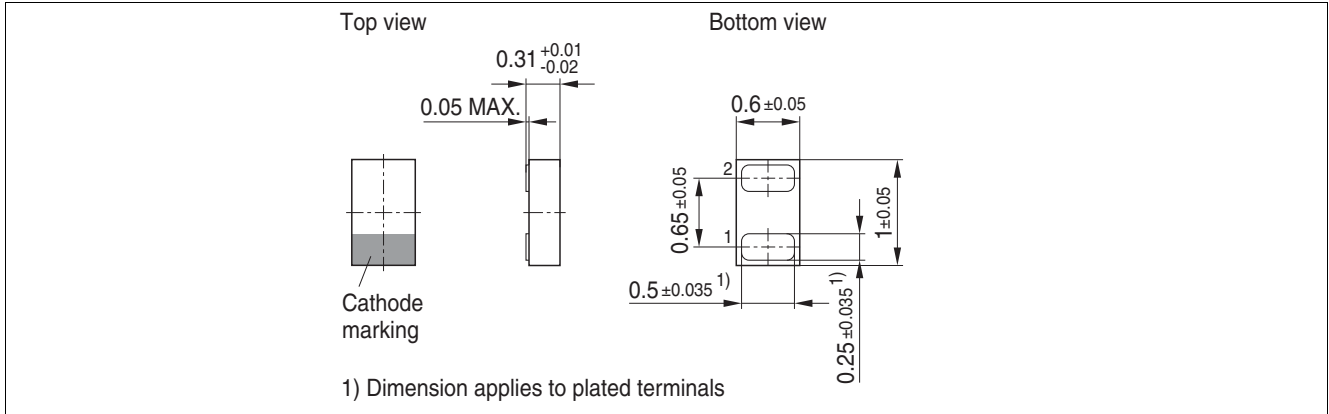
TSLP-2-19: Package outline (dimension in mm)
